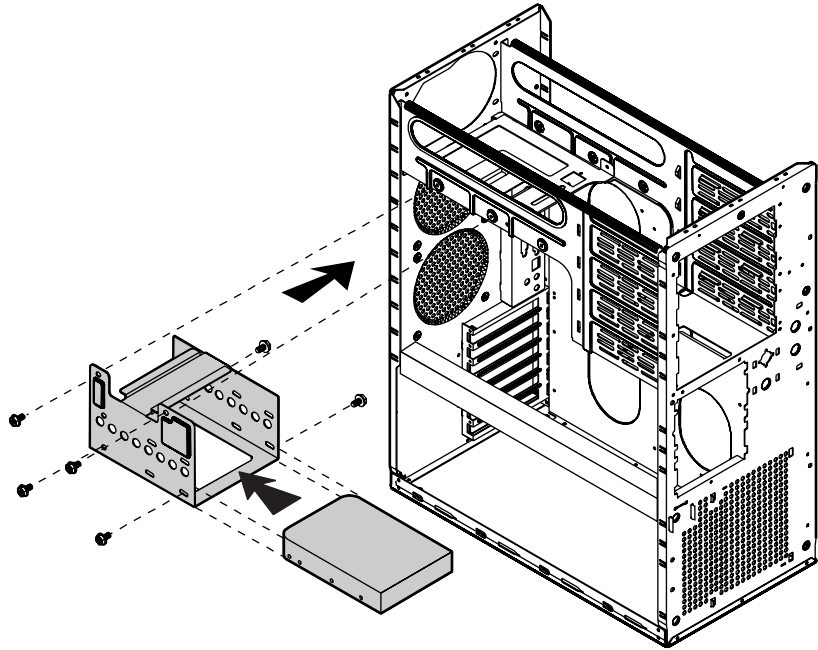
Installing a Hard Drive in the Rear Drive Bay
